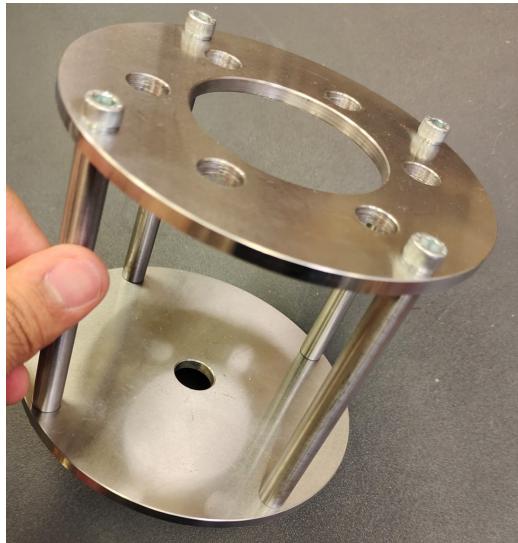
Manufactured and assembled thruster assembly. Source: Own.
